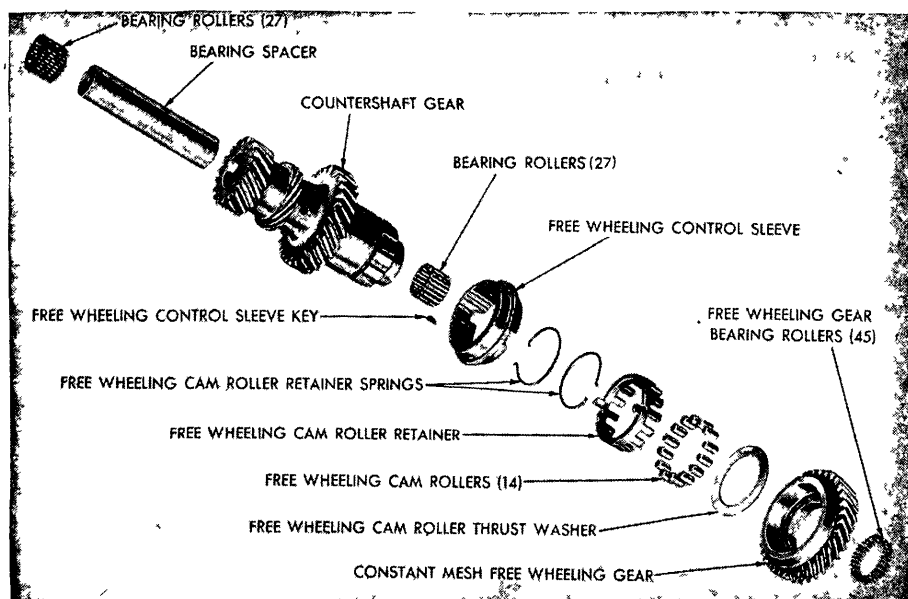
Layout of countershaft gear and free wheeling parts. 1946-52 automatic transmission
